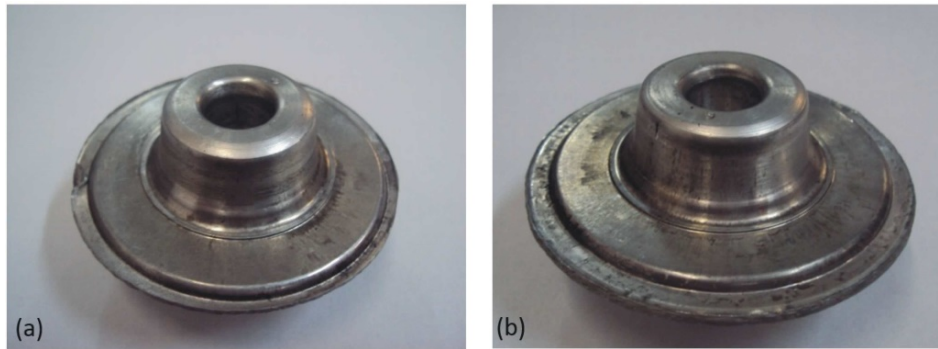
Forged parts: (a) Tubular workpiece; and (b) Cylindrical workpiece.
